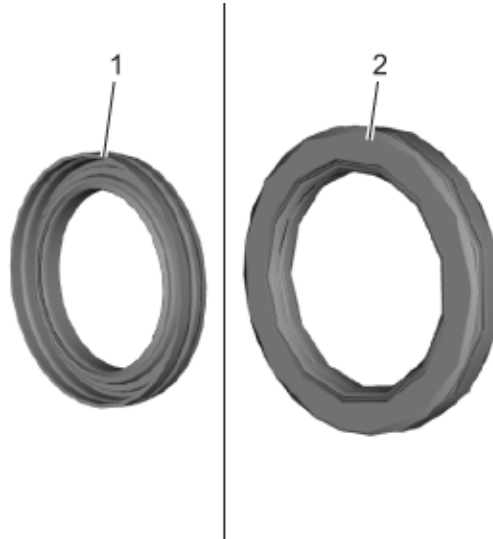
Identifying Crankshaft Front Oil Seal Designs
